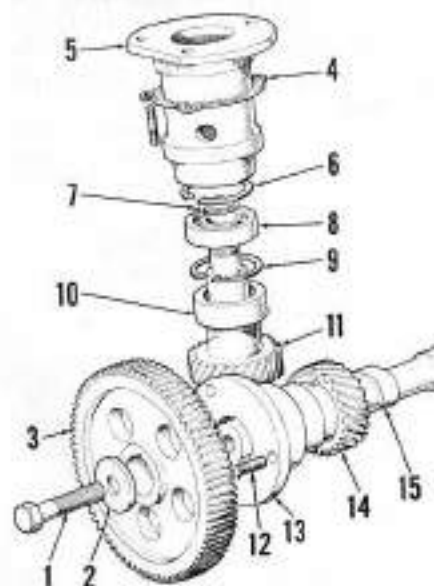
Exploded view of 3-cylinder diesel injection pump drive gears; refer to Fig. 63 for cross-sectional view and to Fig. 63 for retiming pump drive gear to camshaft.
